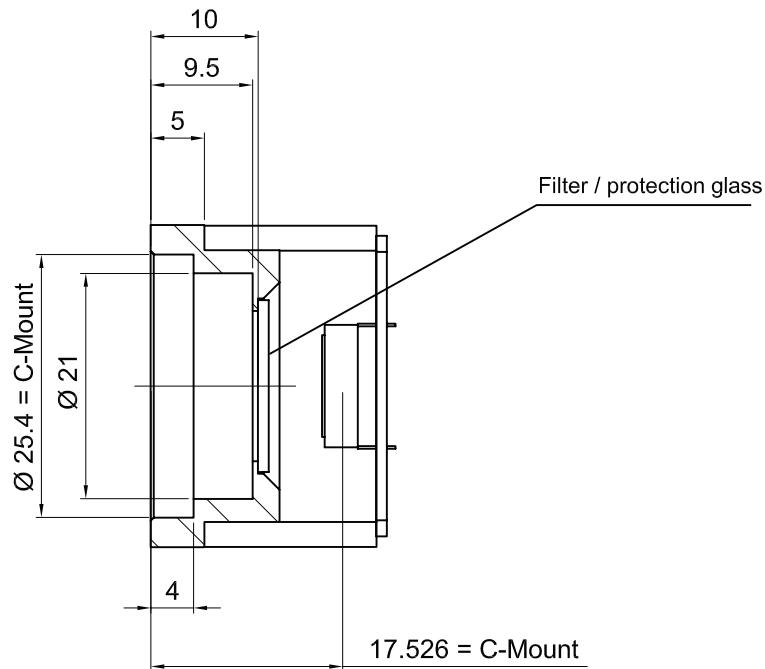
Guppy C-Mount dimensions (old CS-/C-Mounting)
